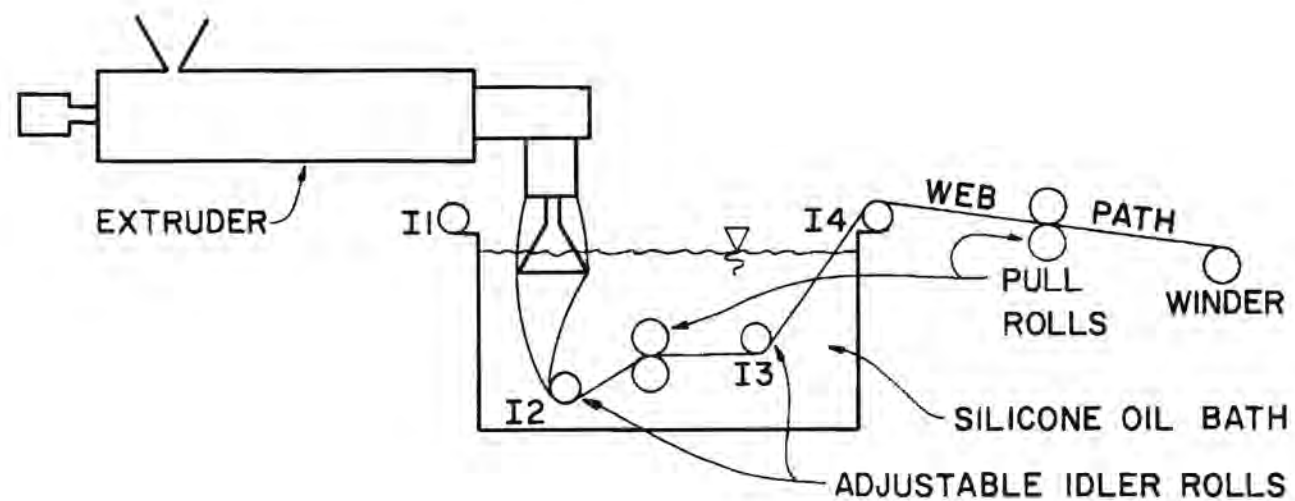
Schematic of Continuous Drawing System shown in line with Extruder.
